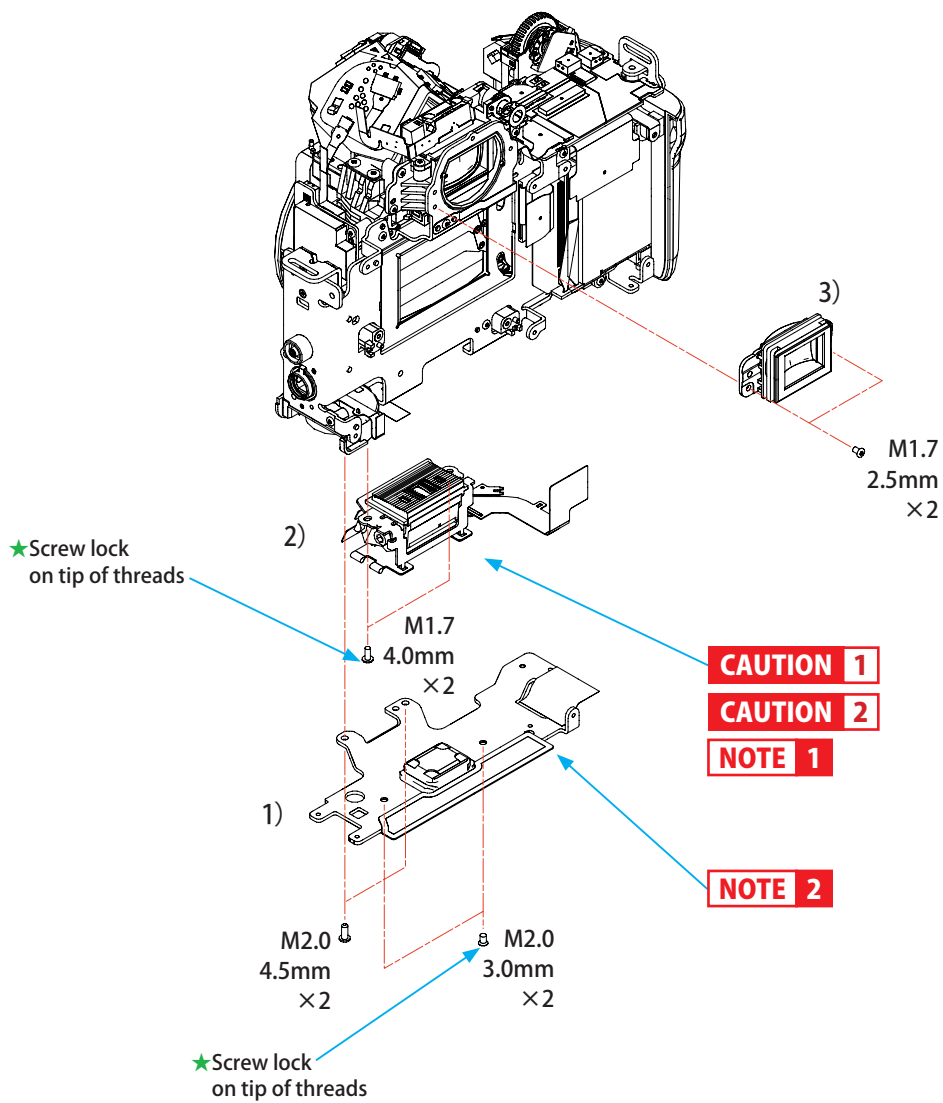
Baseplate / AF Sensor Unit / Eyepiece Cover Removal
